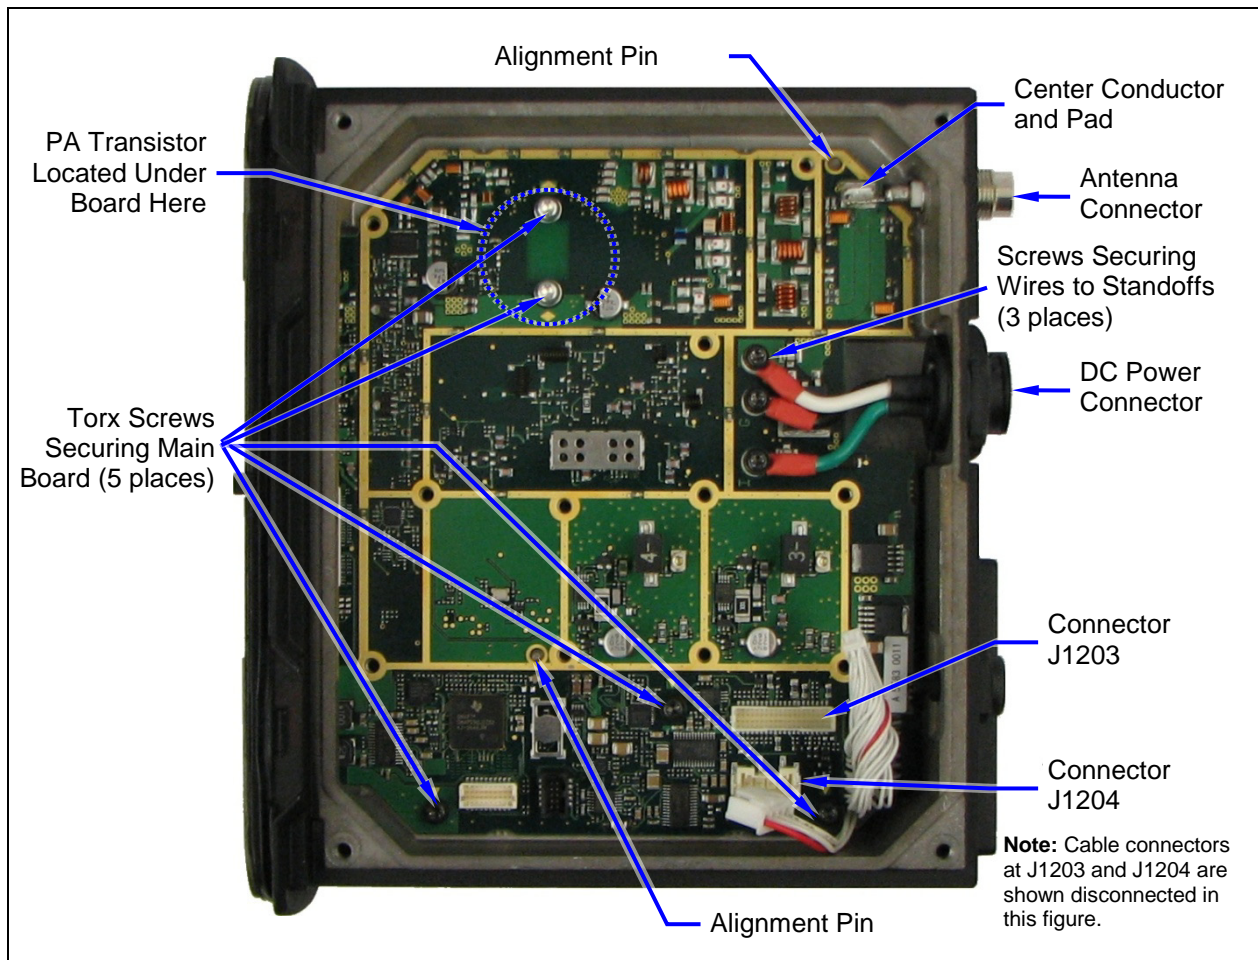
Removing the Main board (Radio Shown without Bottom Cover and RF Shield)
